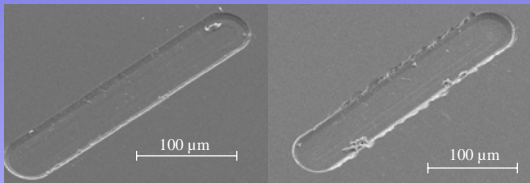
a) Groove machined in ULE glass with ductile mode grinding b) Groove machined in ULE glass with brittle mode grinding
